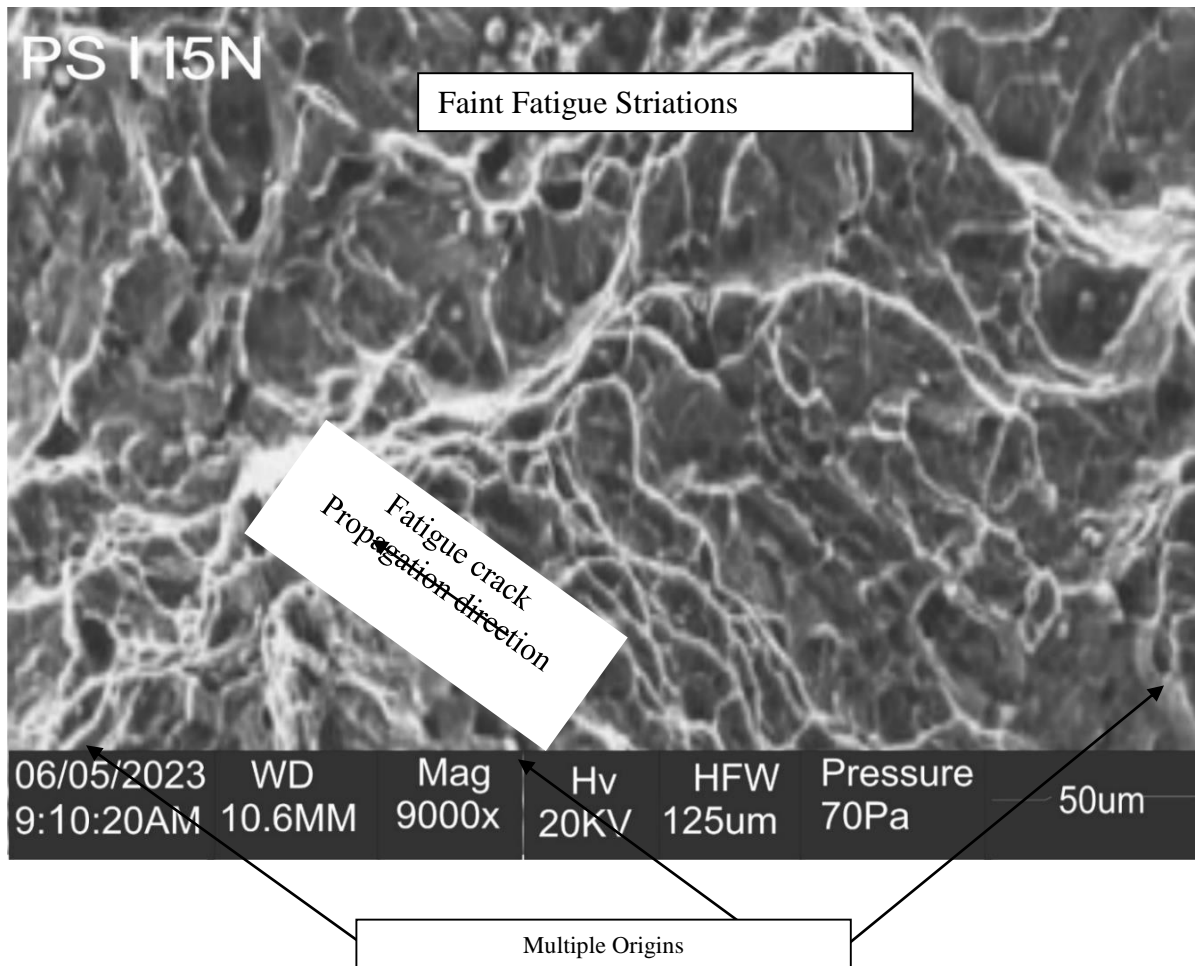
Fatigue fracture surface of samples strained at 0.77.
